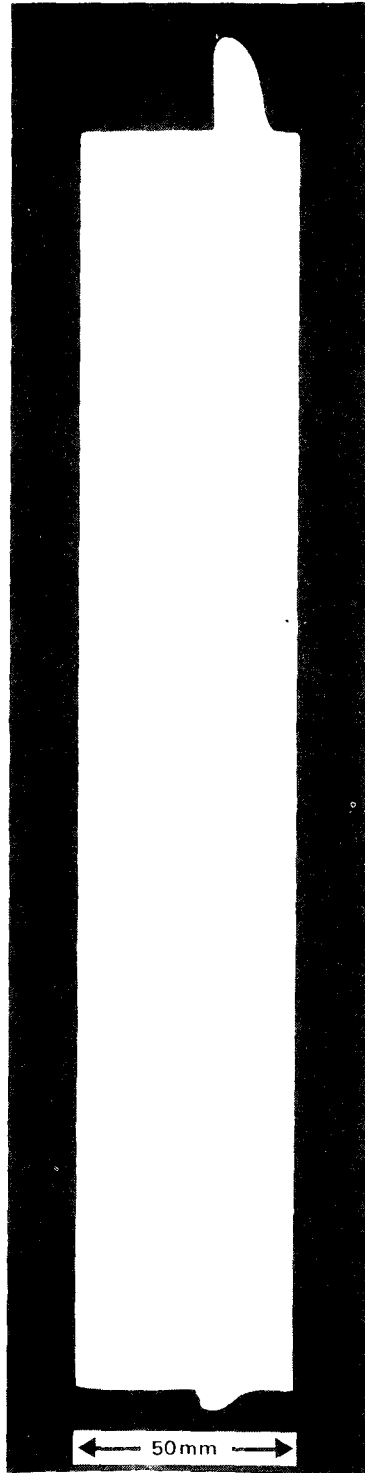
Single pass EB weld in 280mm thick C-Mn steel
